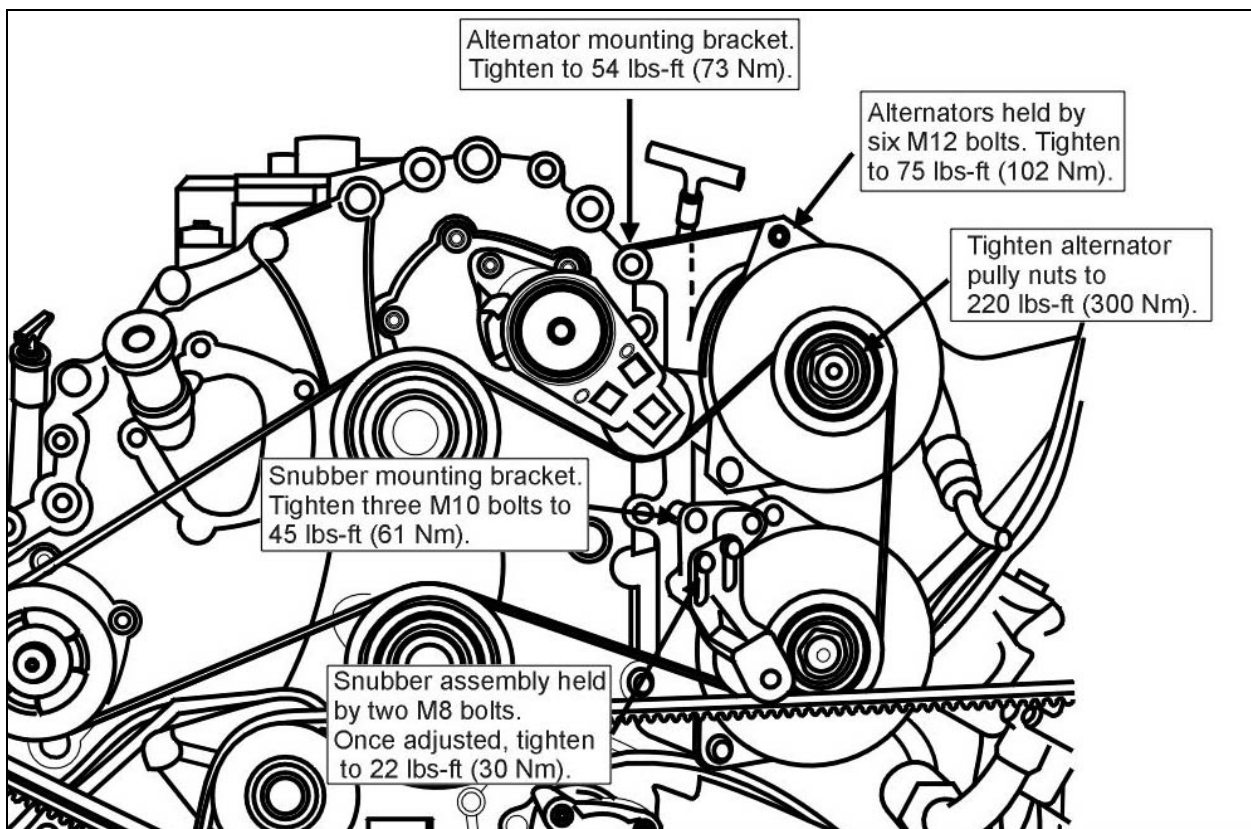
ALTERNATORS AND ACCESSORIES MOUNTING TORQUES
